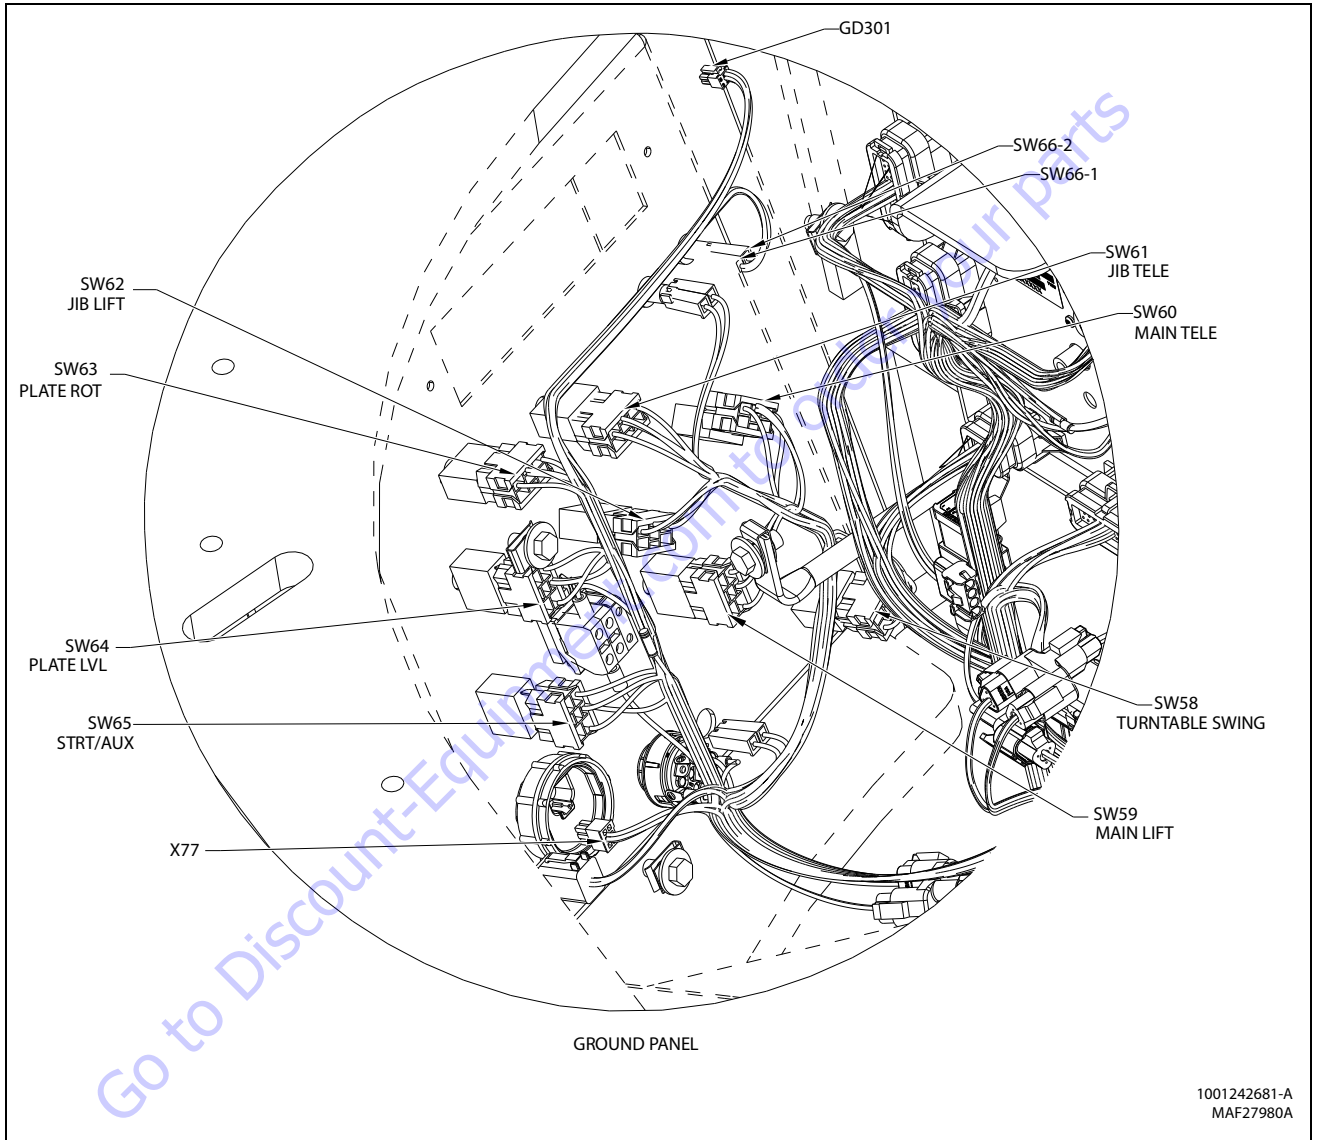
Electrical Installation (T4F) - Sheet 4 of 11
